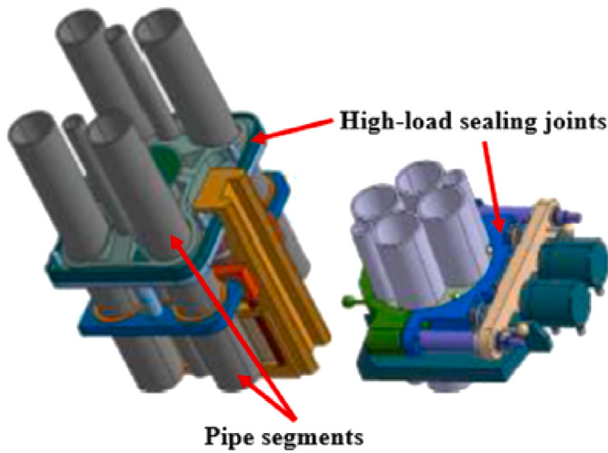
Multiple-pipe mechanical joint for DEMO blanket coolant pipes.
